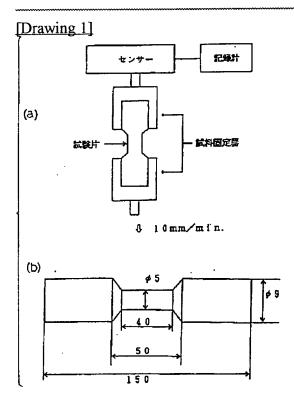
It is drawing in which the equipment and the test piece which are used for the creep test by the fracture timing measurement at the time of ordinary temperature are shown, (a) shows equipment and (b) shows a test piece, respectively.
